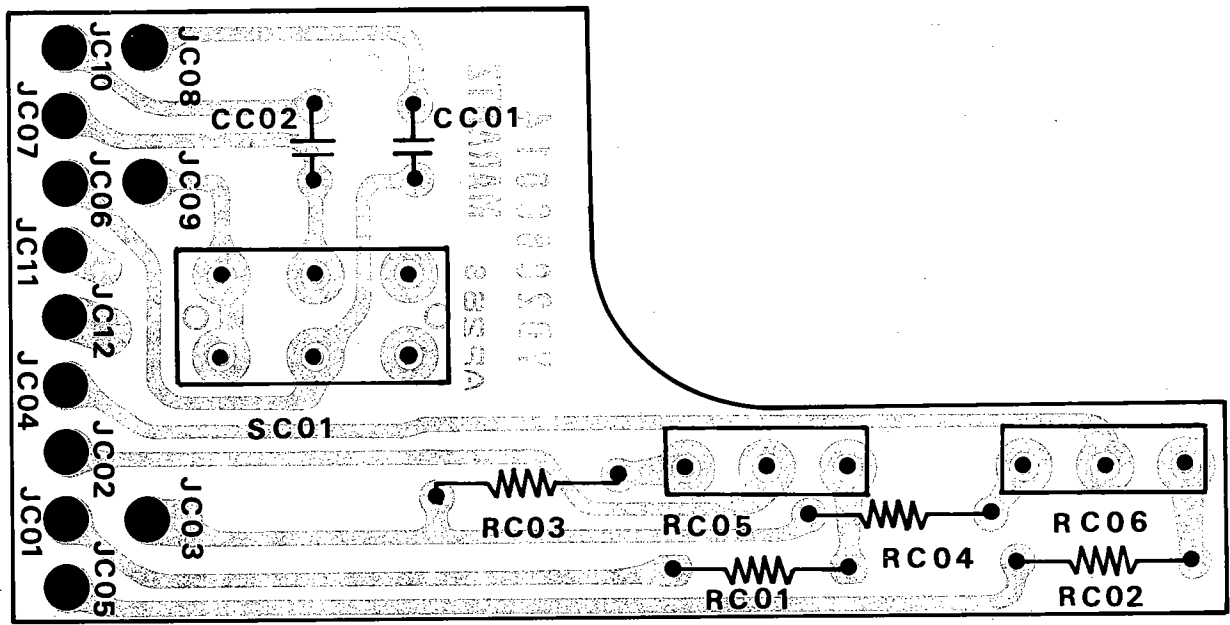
FM De-emphasis Switch Unit Assembly PC01 Component Locations
